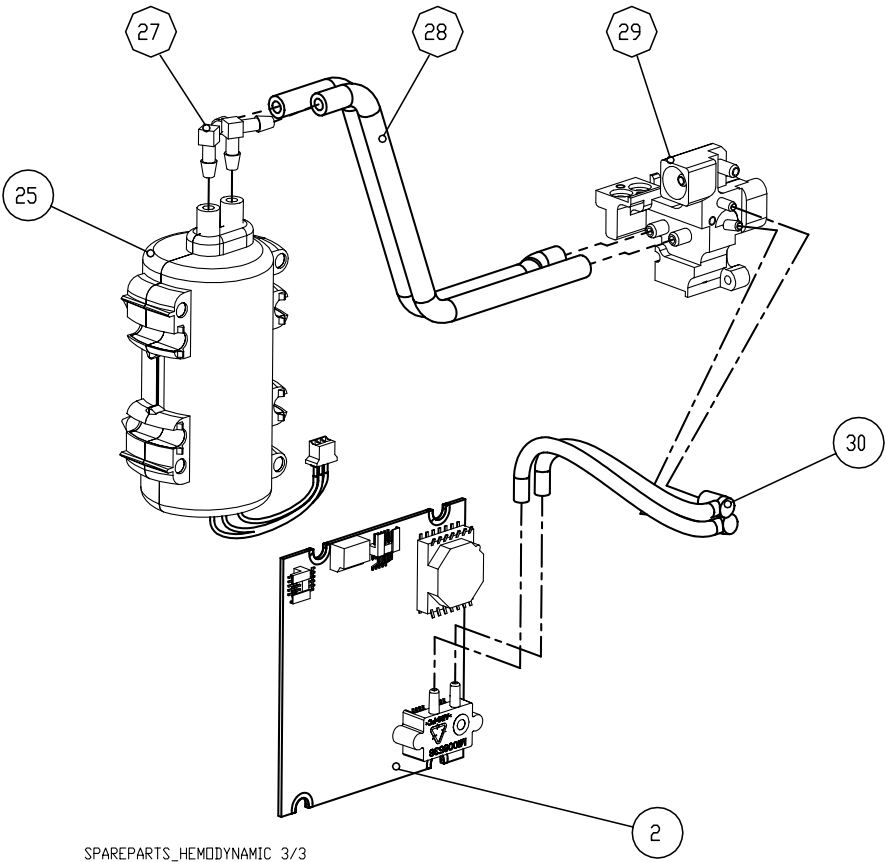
Exploded view of the inner parts of the Hemodynamic Module
